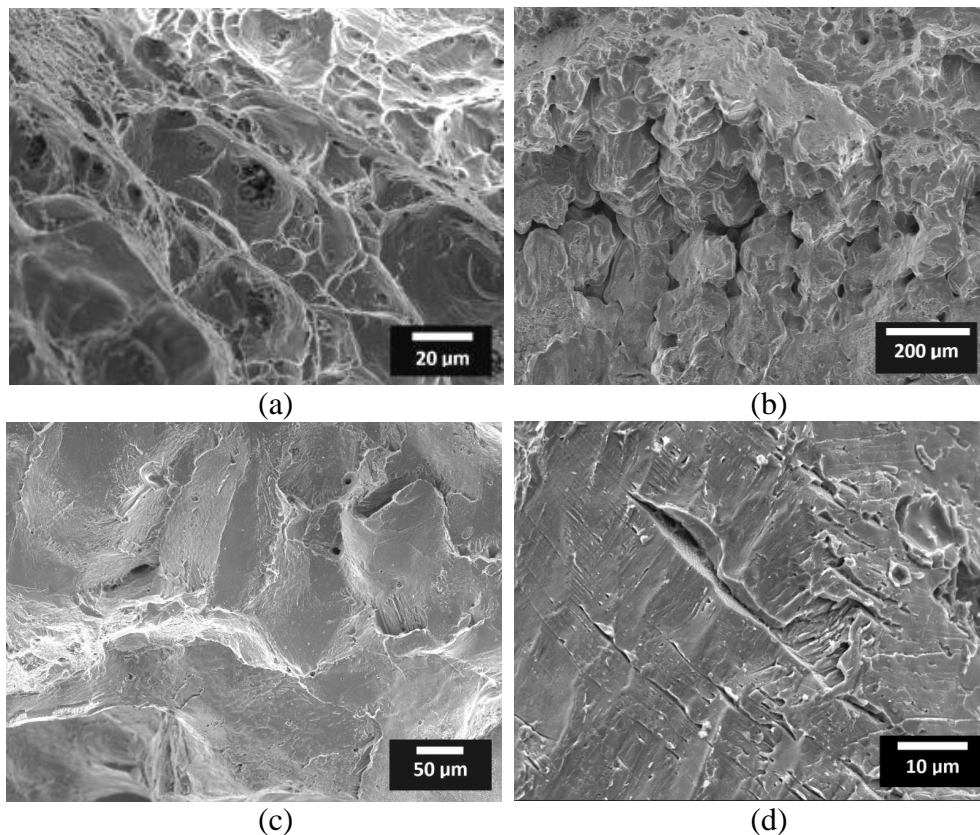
(a) The fracture surface of a specimen from Heat 2-B that was aged for 8hrs to a hardness of 290 BHN shows ductile fracture around clusters of inclusions. (b) Fracture through a large area of porosity in a specimen from Heat 2-B. (c) After aging for 24hrs to a hardness of 335 BHN, a specimen from Heat 2-B shows intergranular fracture and some areas of transgranular fracture. (d) Areas on some grains in specimens from Heat 2-B that were aged for 24hrs showed either cracking in shear bands or de-cohesion of atomic planes.
